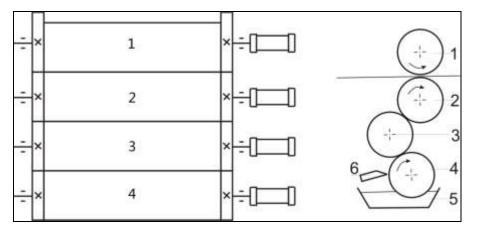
The printing unit (1-Press roller, 2-Rubber roller, 3-Ink distributing roller, 4-Inking roller, 5-Ink tank, 6-Scraper)
